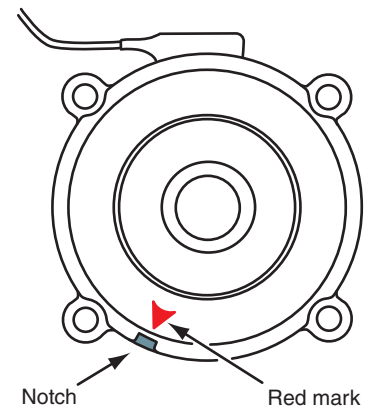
The index marks should align if the clockspring is properly centered.
